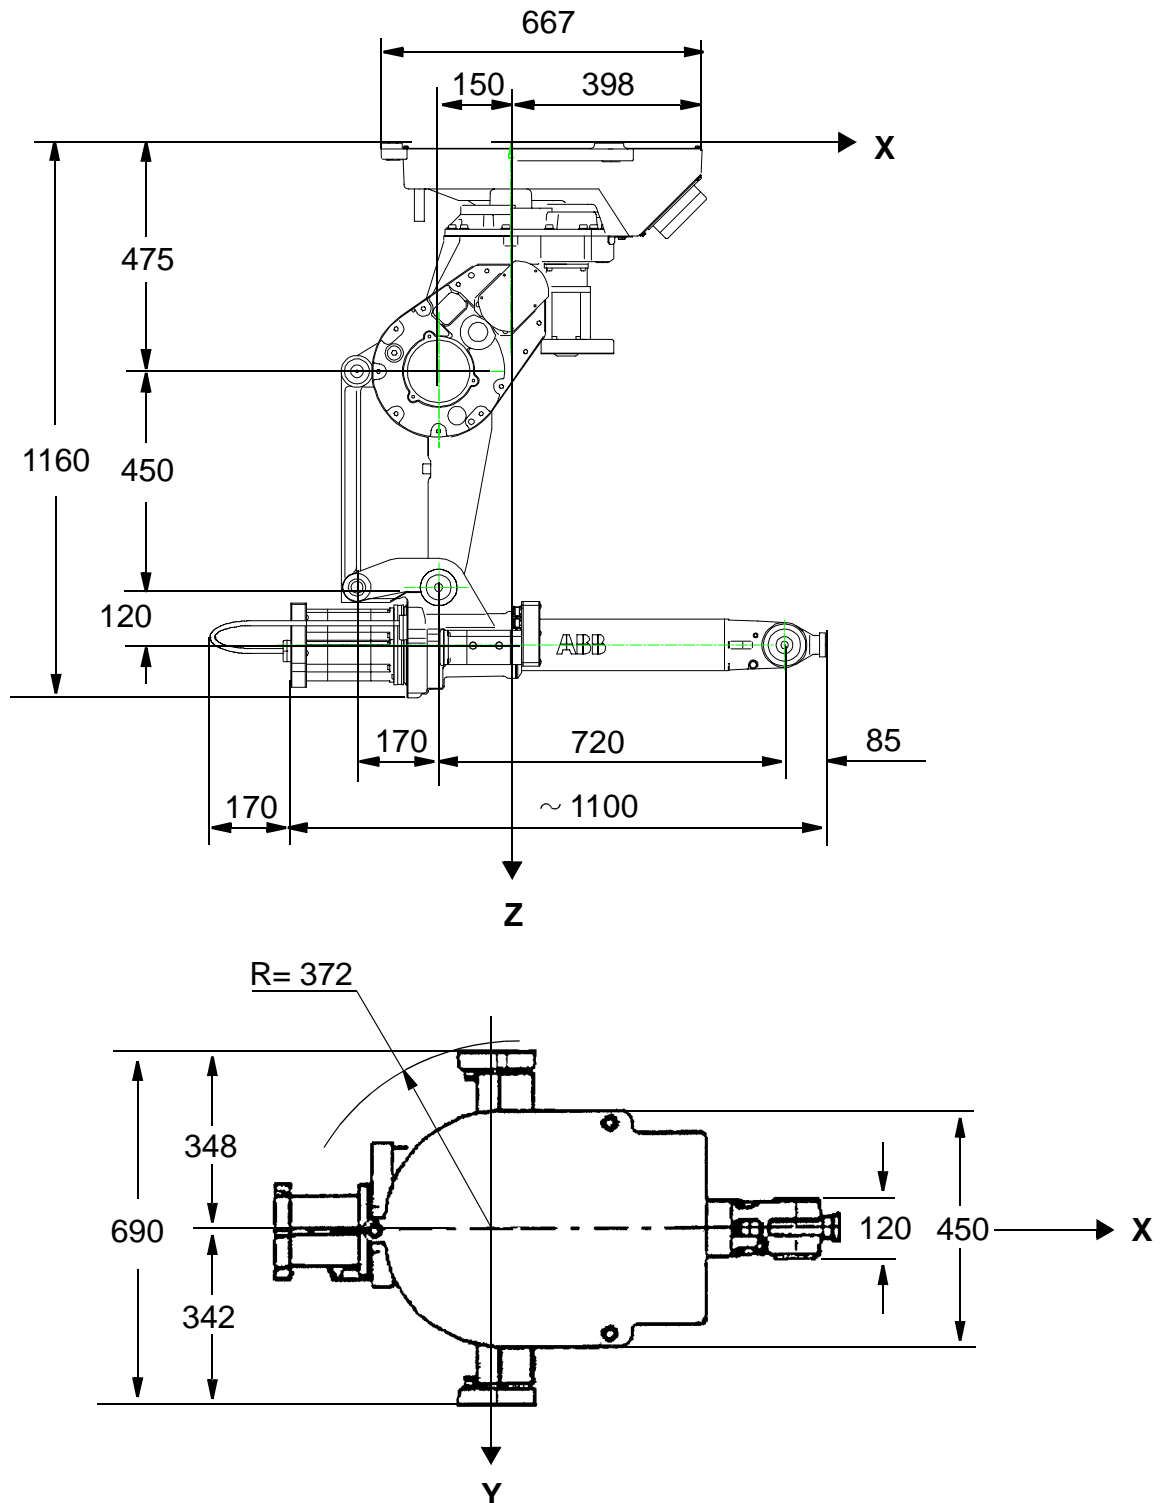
View of the manipulator (inverted mounted version) from the side and above (dimensions in mm).
